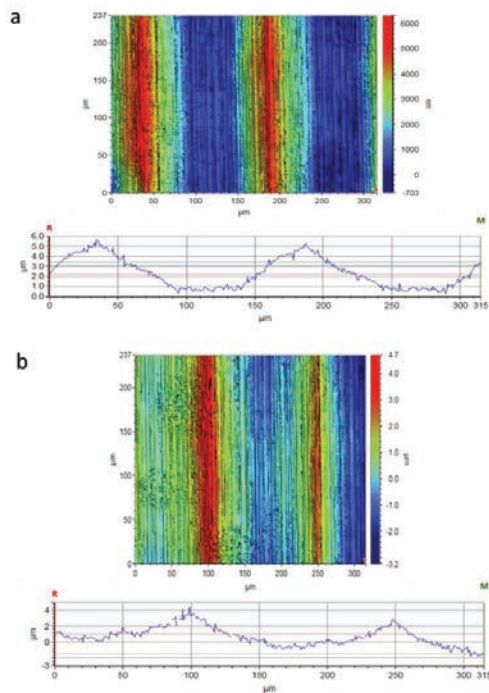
(a) Region machined with the uncoated insert (b) Region machined with the coated insert
